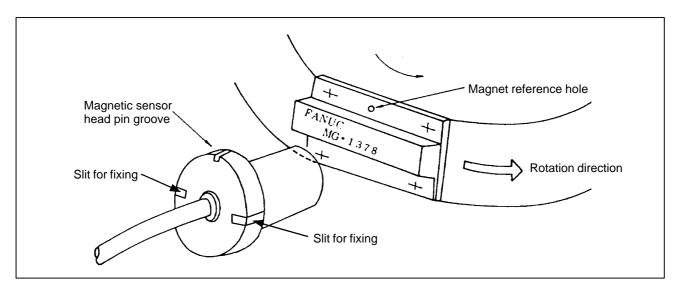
(d) Example of Mounting a Magnetic Sensor (4) (Mounting Magnetic Sensor Q, R, S, or T)
